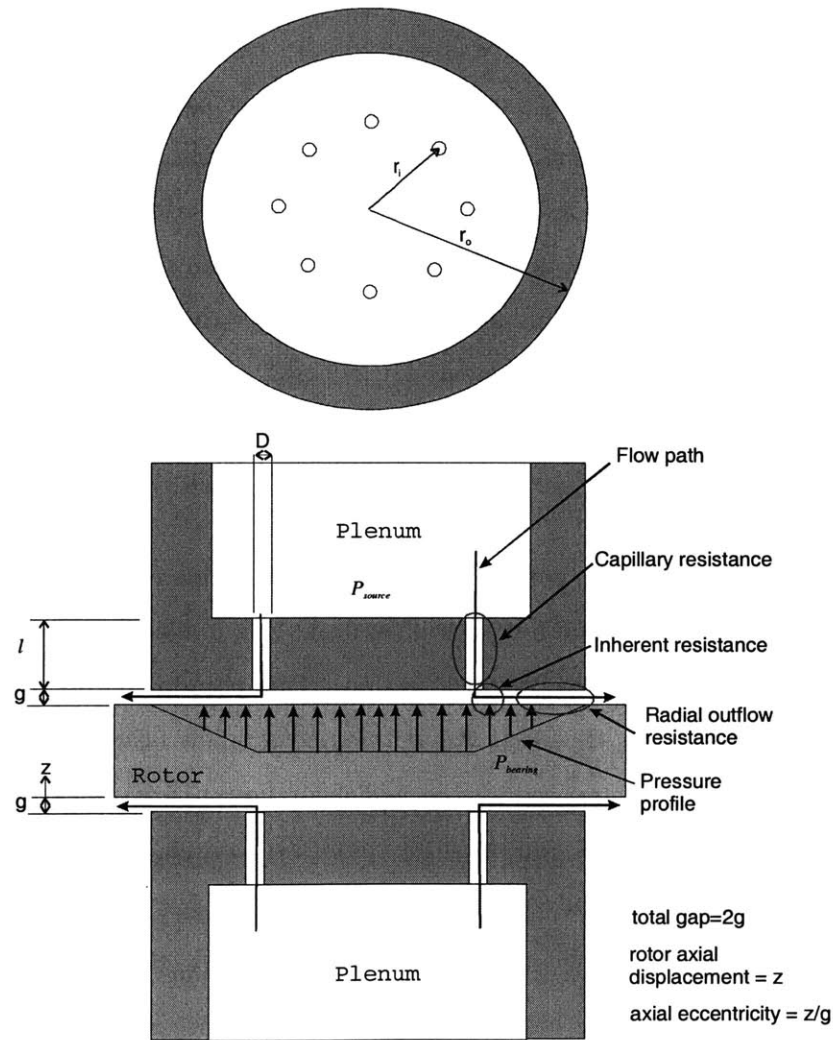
Schematic of hydrostatic thrust bearings (from Fr  chette [13])
